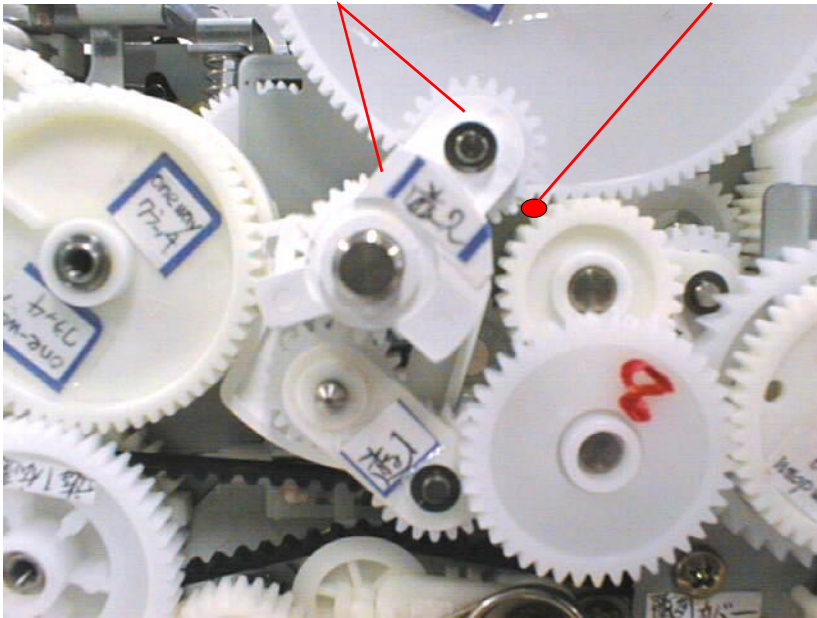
Condition of Planetary Gear 2 without Paper Tray
